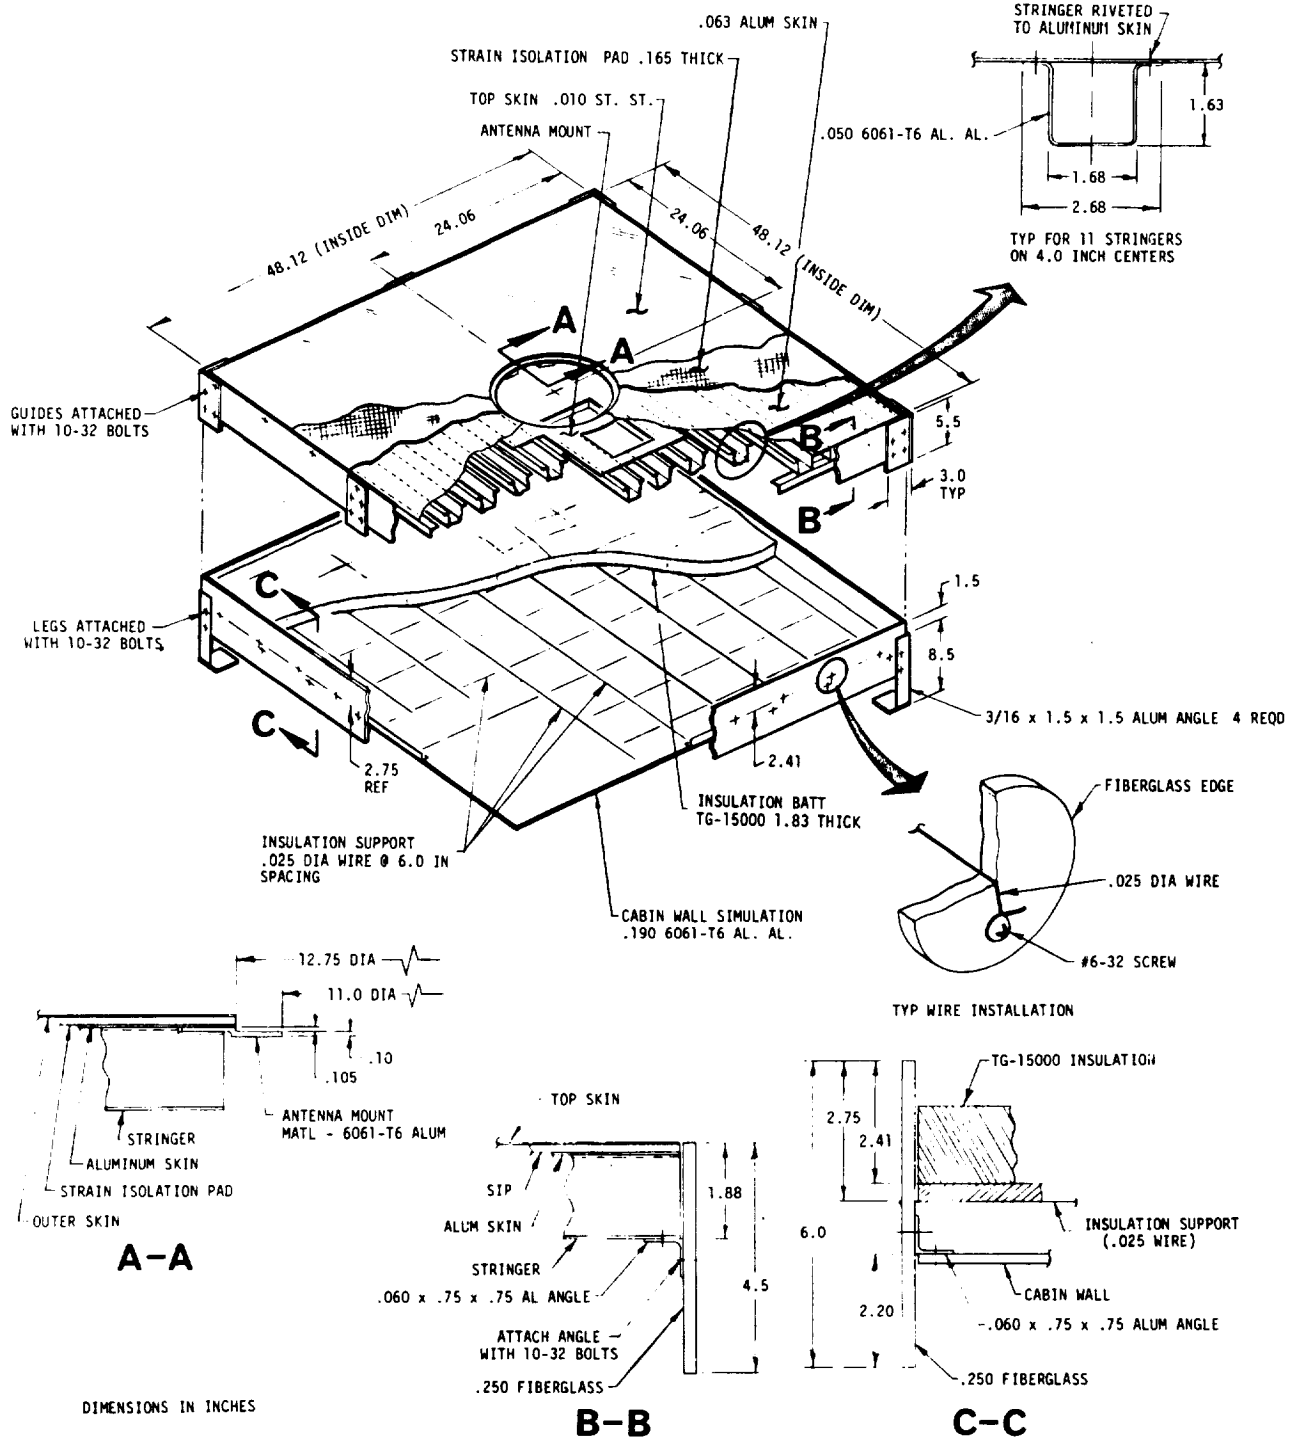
THERMAL TEST FIXTURE PRIOR TO INSTALLATION IN TEST CHAMBER
